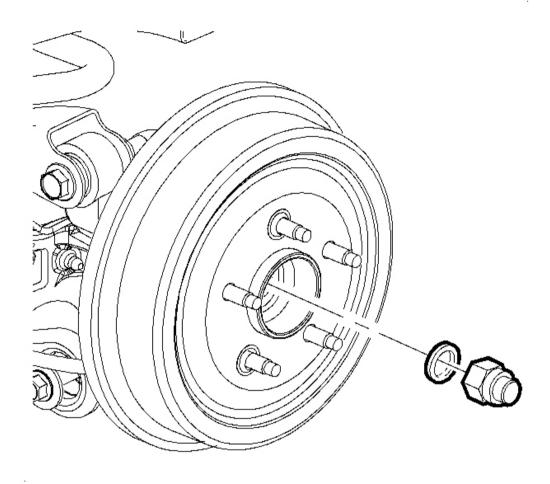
Rear Brake Drum & Wheel Drive Shaft Spindle Nut Courtesy of GENERAL MOTORS CORP.
